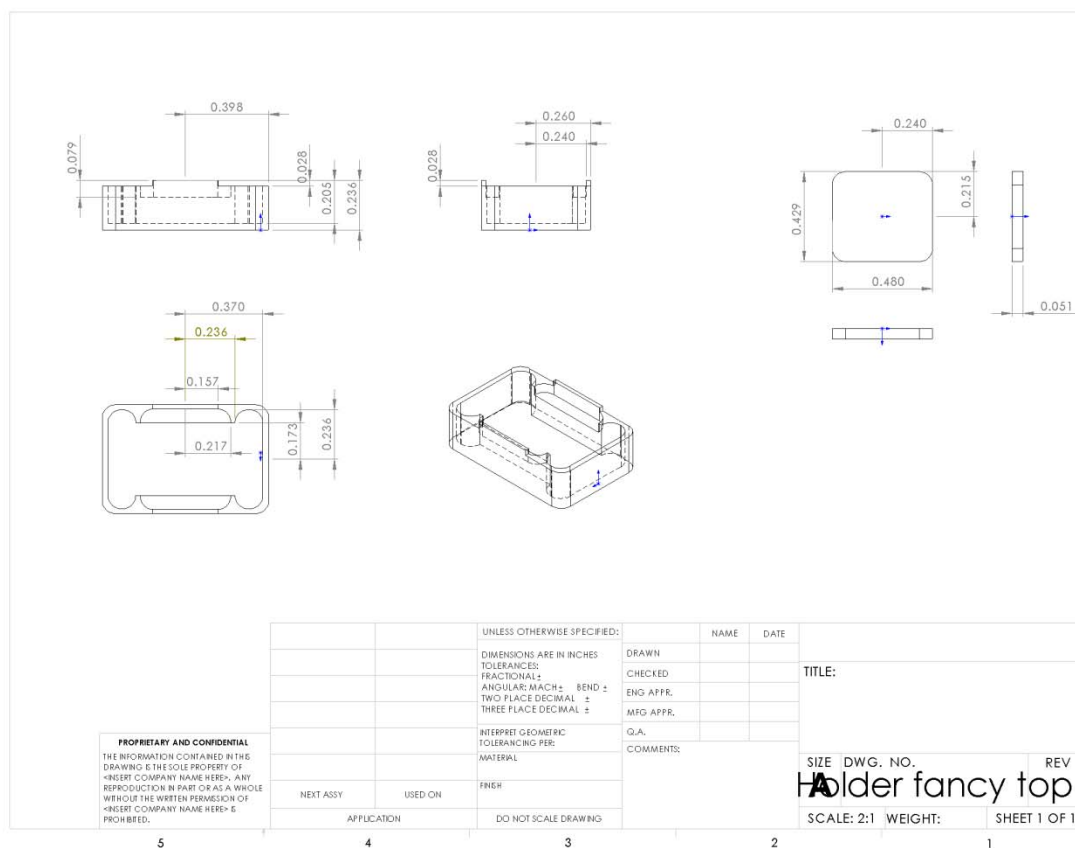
Schematic drawings showing the dimensions of the graphite gas-reactant source holder (left) and the graphite sample holder (right).
